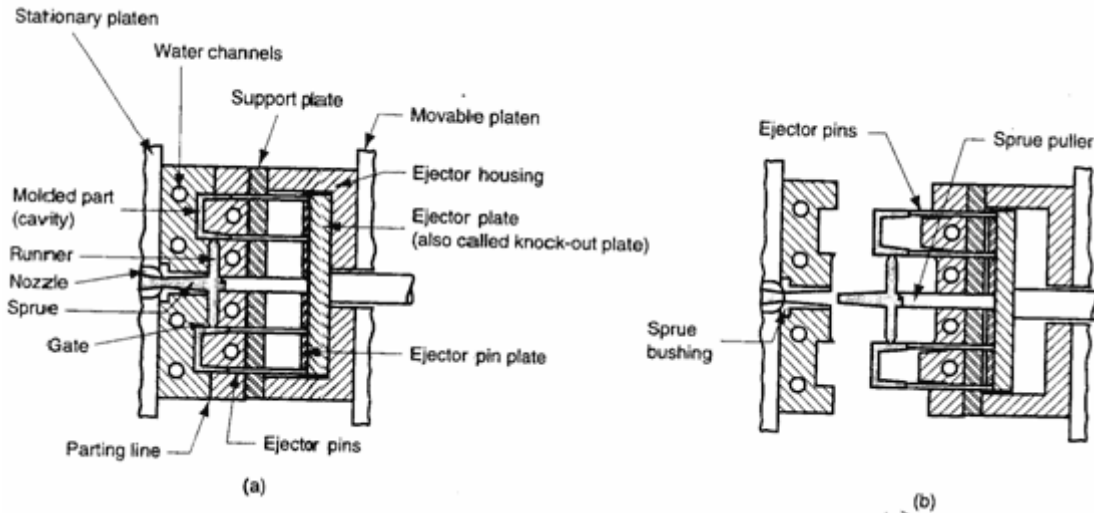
Two-plate mold. (a) Closed & .(b) Opened.[2]
